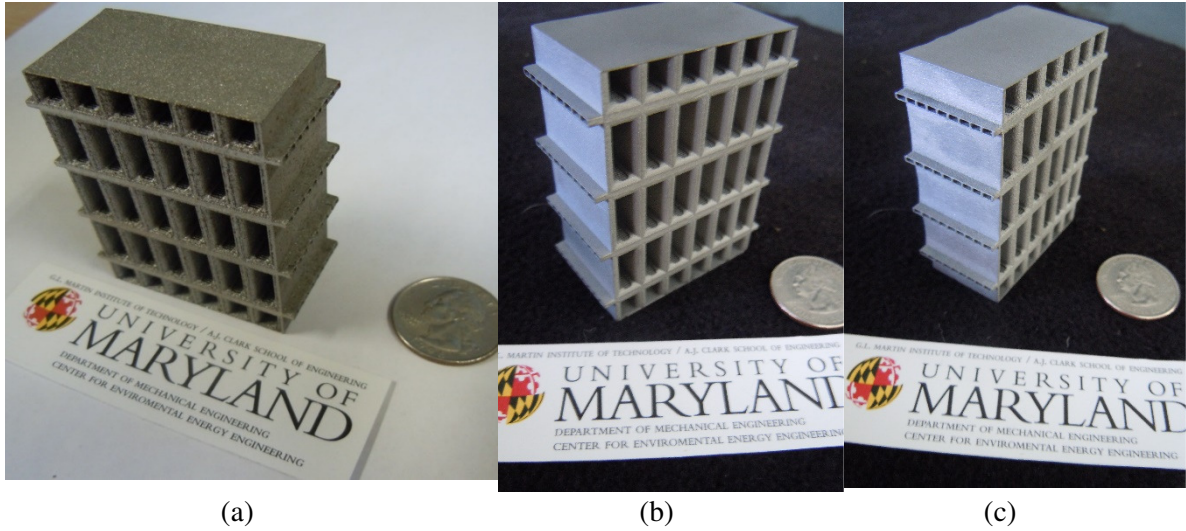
Fabricated test coupons core (a) Titanium alloy (b) Stainless steel (c) Aluminum
